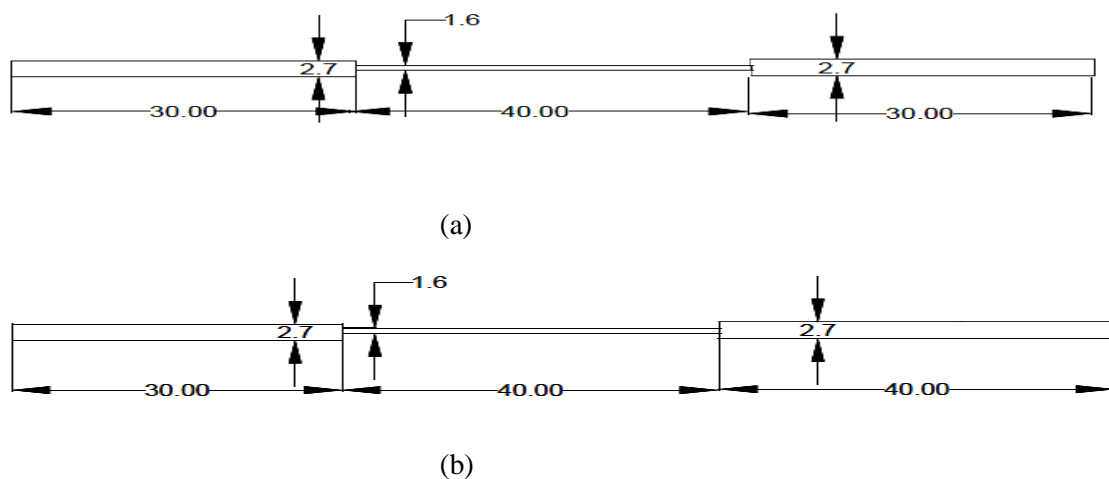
Specimen for test with actuator (a) upper part (b) lower part (All Dimensions are in cm)
